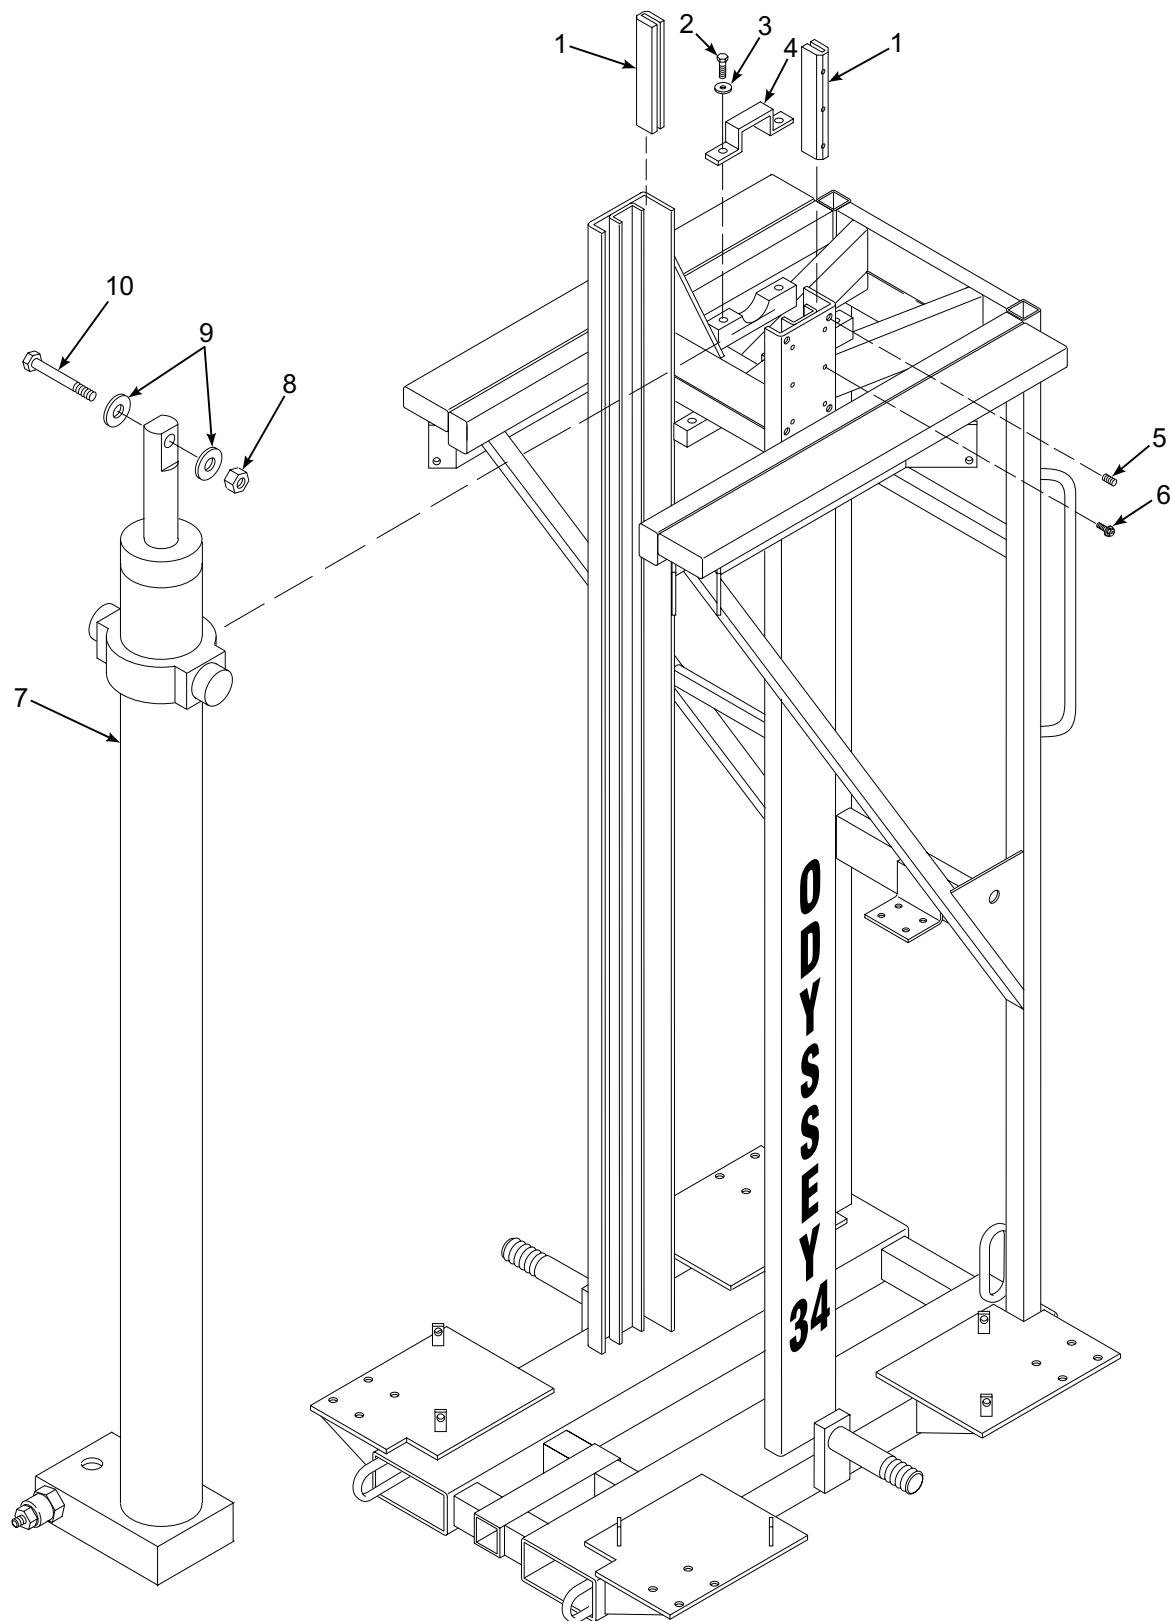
Mast Cylinder and Slide Blocks Exploded View
